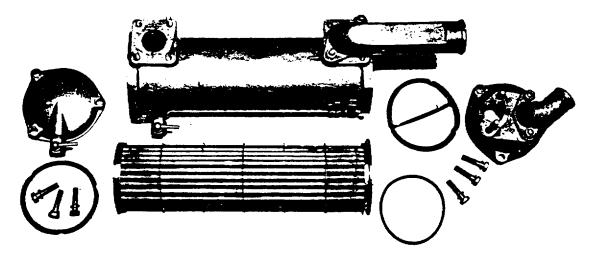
Exploded View of Heat Exchanger. (lowline engines)
